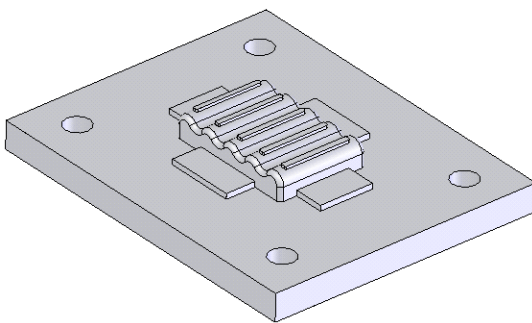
Core of the mold for manufacturing this Soap Case.
